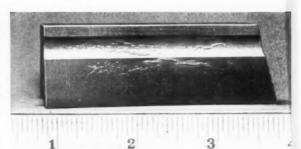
(middle, bottom) Longitudinal section cut from same bar — again showing conditions indicated by Magnaflux test shown in Fig. 13. (Retouched)
